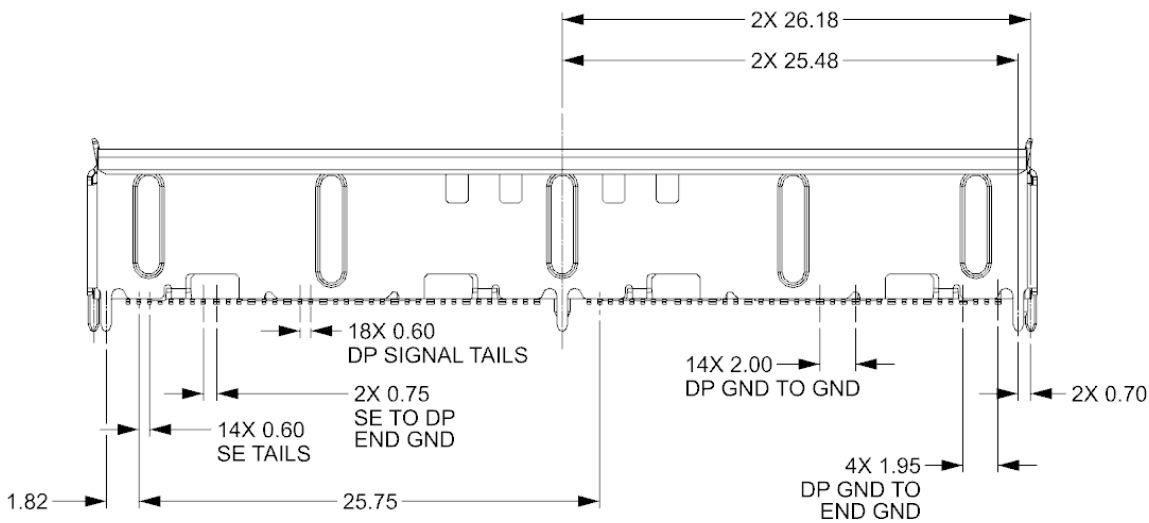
Dual-Bay Back View of Fixed-Side Connector Cage
